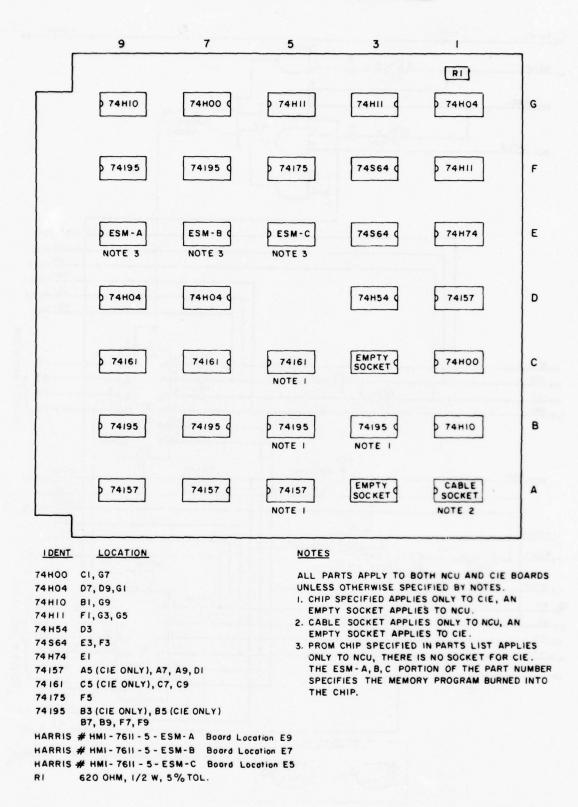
NCU and CIE MD1 Board, Parts Layout Diagram and Parts List
